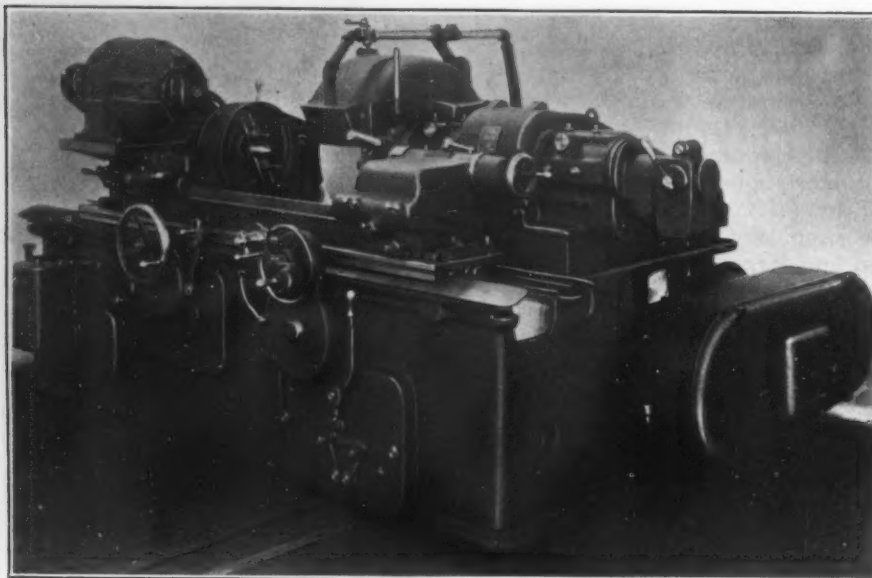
A HEAVY WIDE-WHEEL MACHINE
